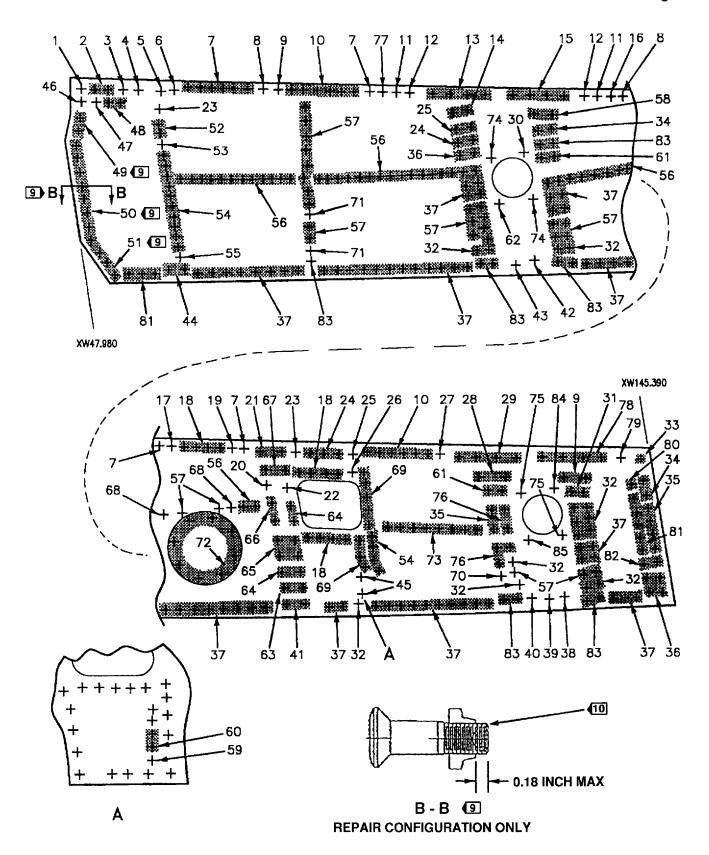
Skin (74A110954) Fasteners (Sheet 1)
